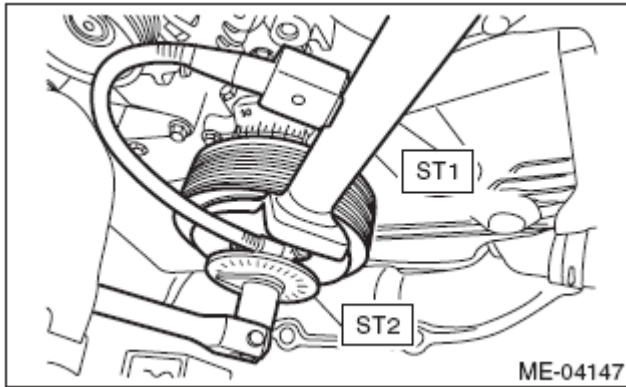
Tightening Crankshaft Pulley Bolts Using Crank Pulley Wrench And Angle Gauge
